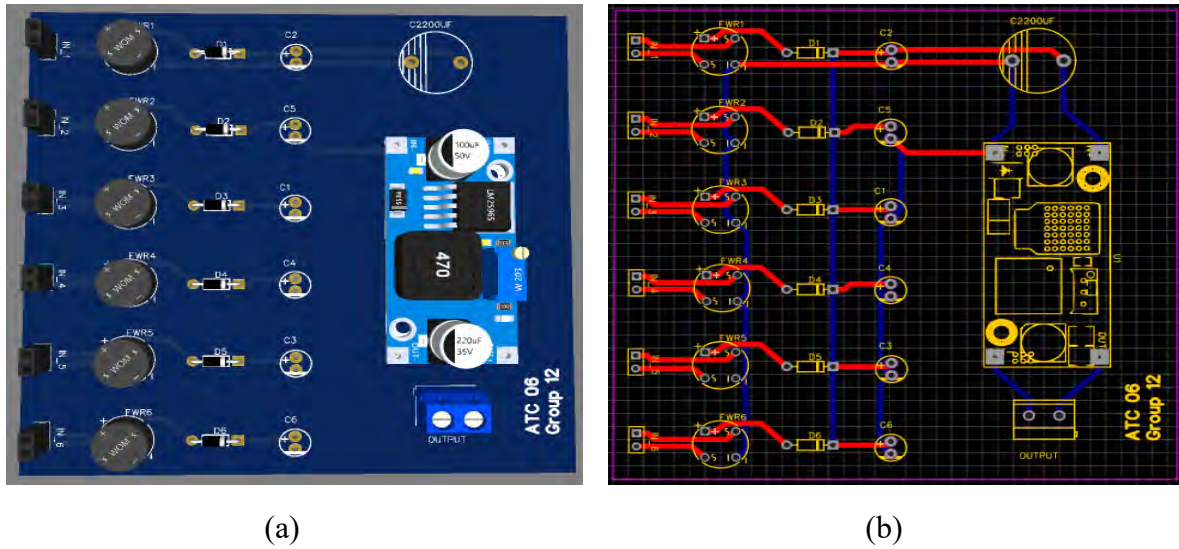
(a) 3D view of the PCB (b) PCB layout
